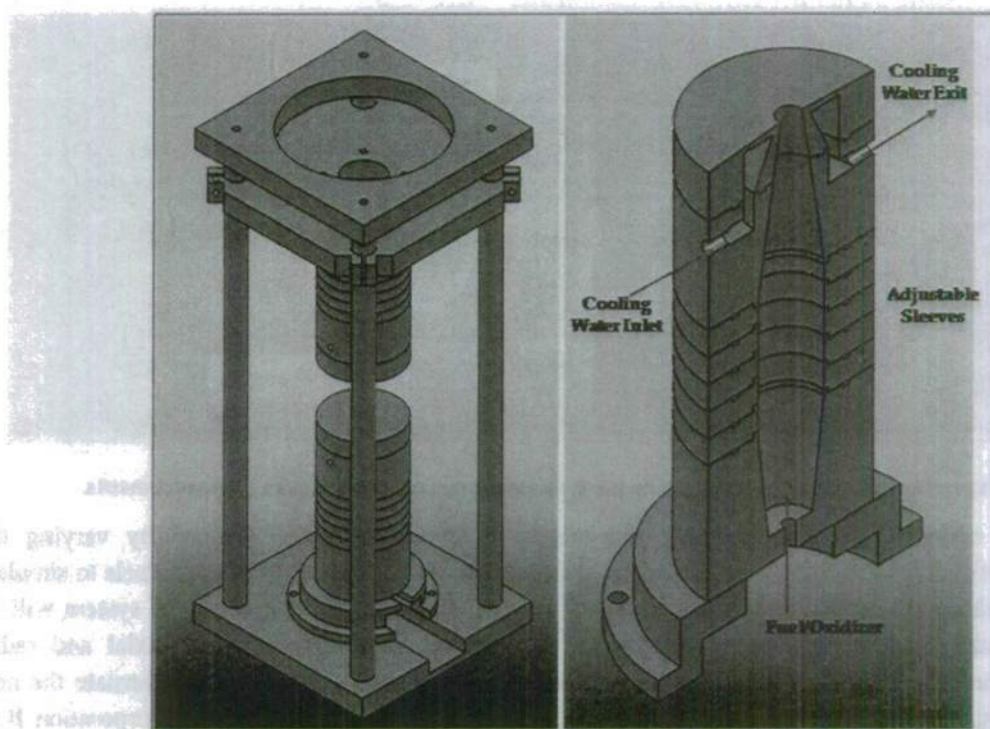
Exploded view showing the construction of the fuel/oxidizer nozzles.
